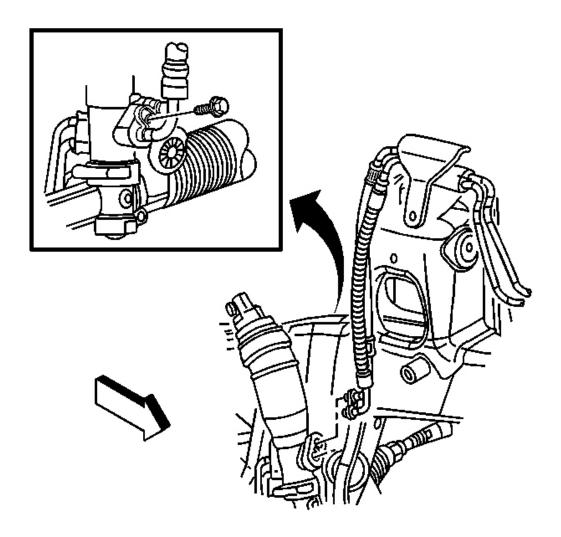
View Of Power Steering Hose Assembly To Gear Retaining Bolt Courtesy of GENERAL MOTORS CORP.
